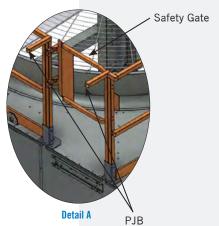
Top Perimeter Guardrails - PFi/PCC-1218, 1220
